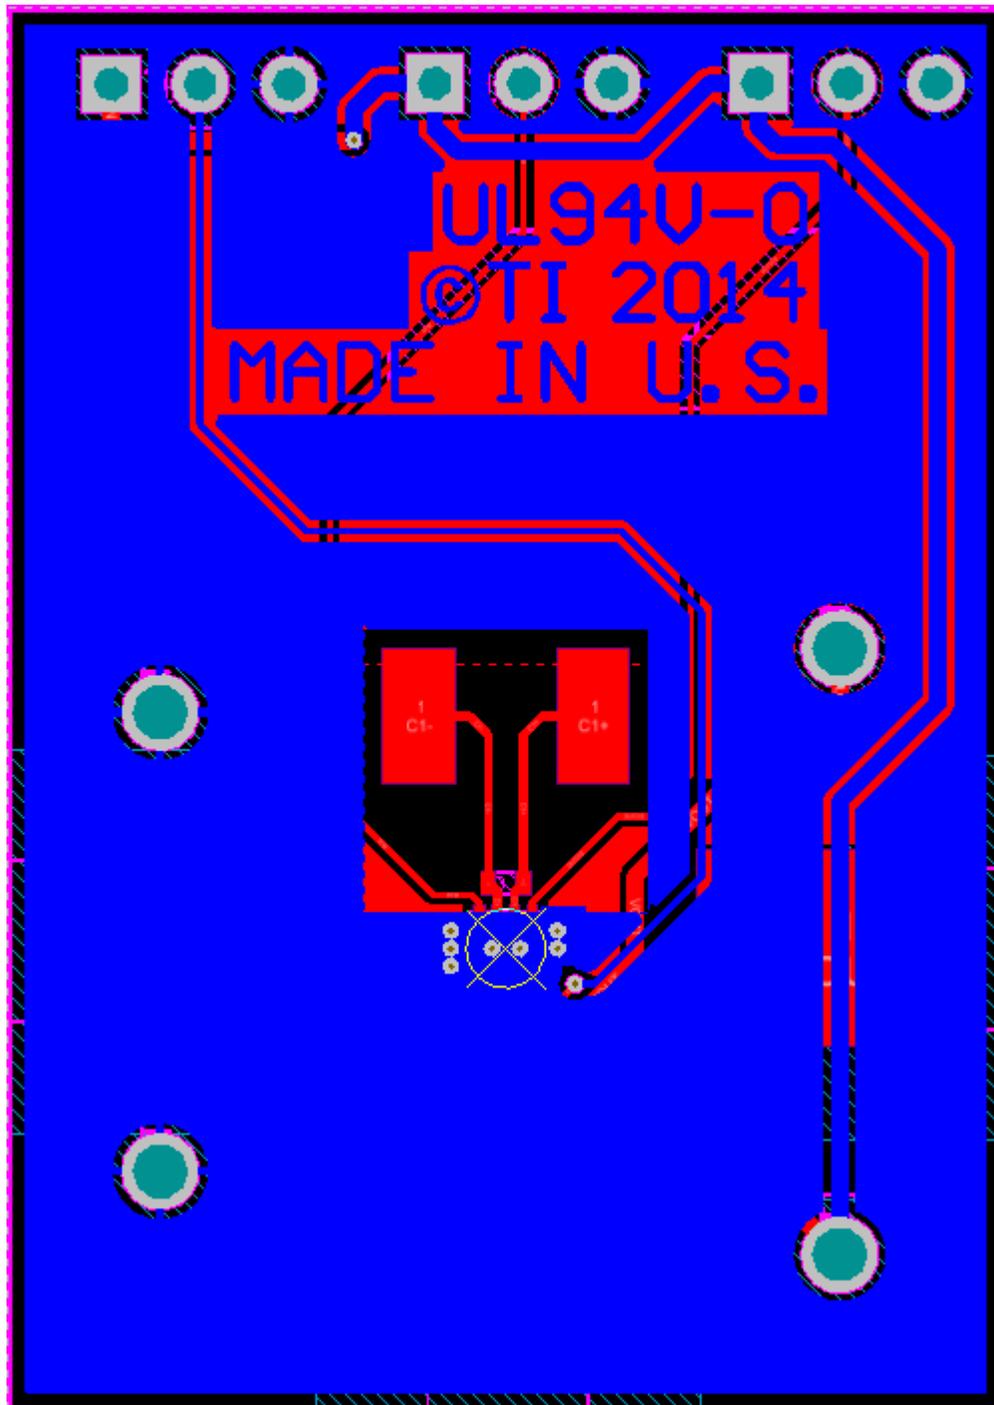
Bottom Assembly Layer (UNMIRRORED)
